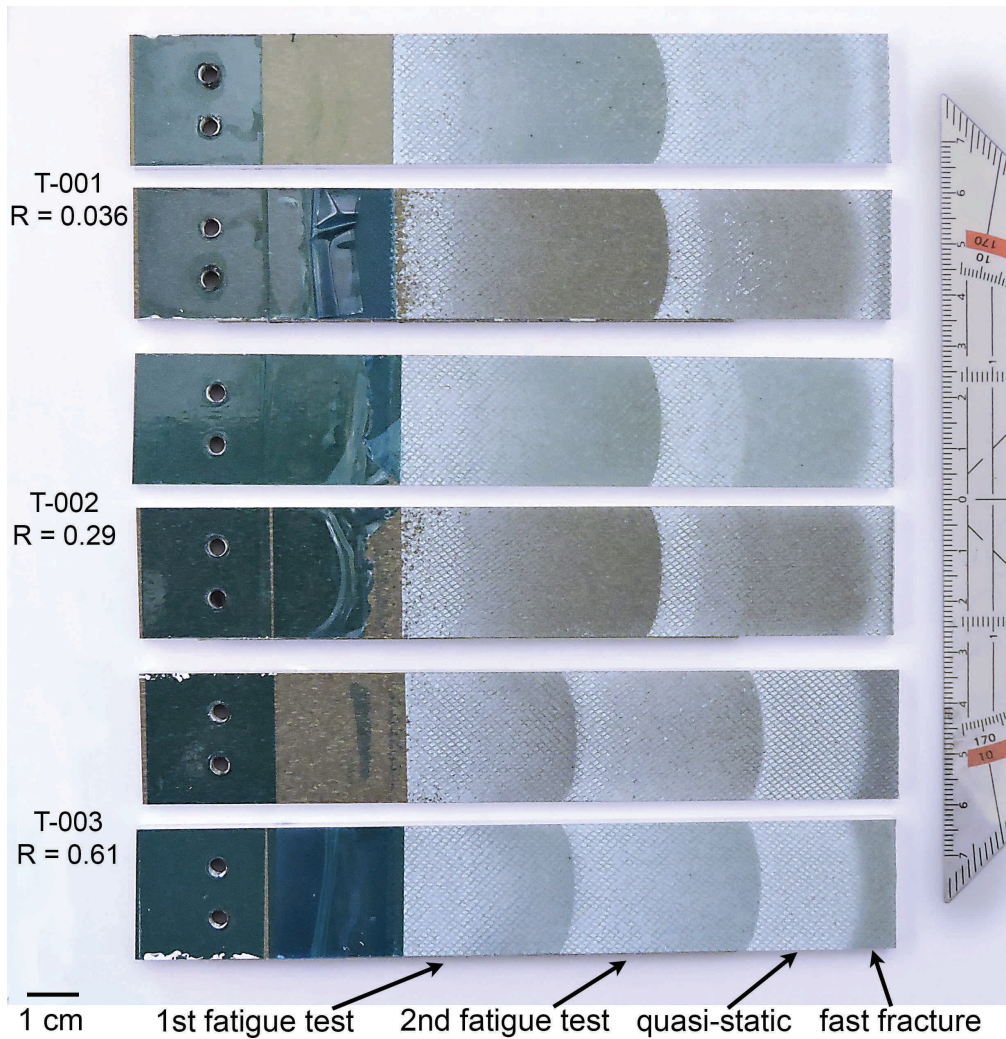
Fracture surfaces of the series T specimens (all tested at 80 °C). Two fatigue tests were performed per specimen, which is clearly visible on the fracture surfaces. The fracture surfaces formed during the quasi-static loading performed to break apart the specimens are also visible. Crack growth direction was from left to right. For specimens T-001 and T-002 one of the fracture surfaces per specimen is almost free of adhesive residue, indicating adhesive failure.
